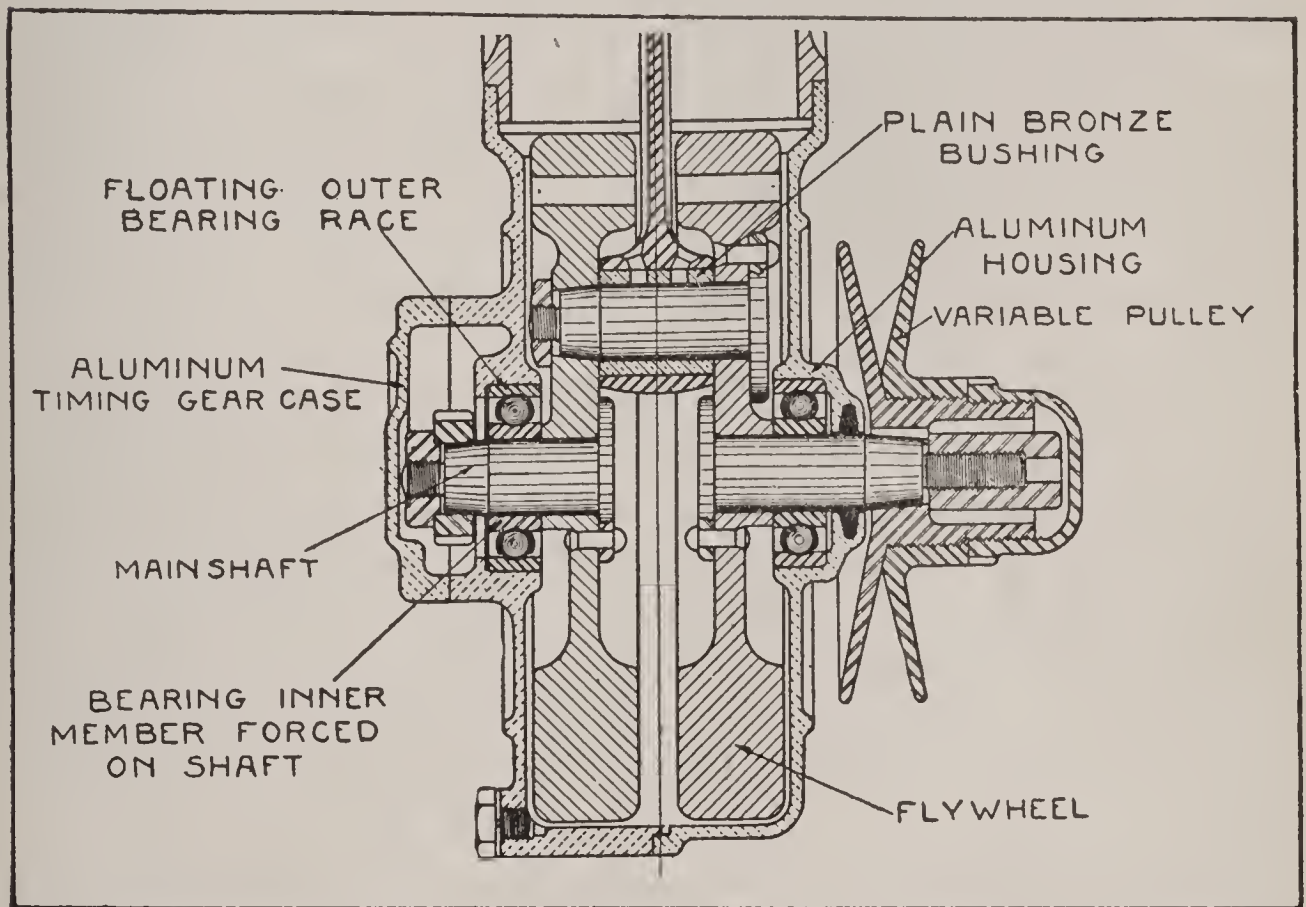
Sectional View of Crank Case, Showing Application of Single Row Ball Bearings in Supporting Flywheel Assembly.
